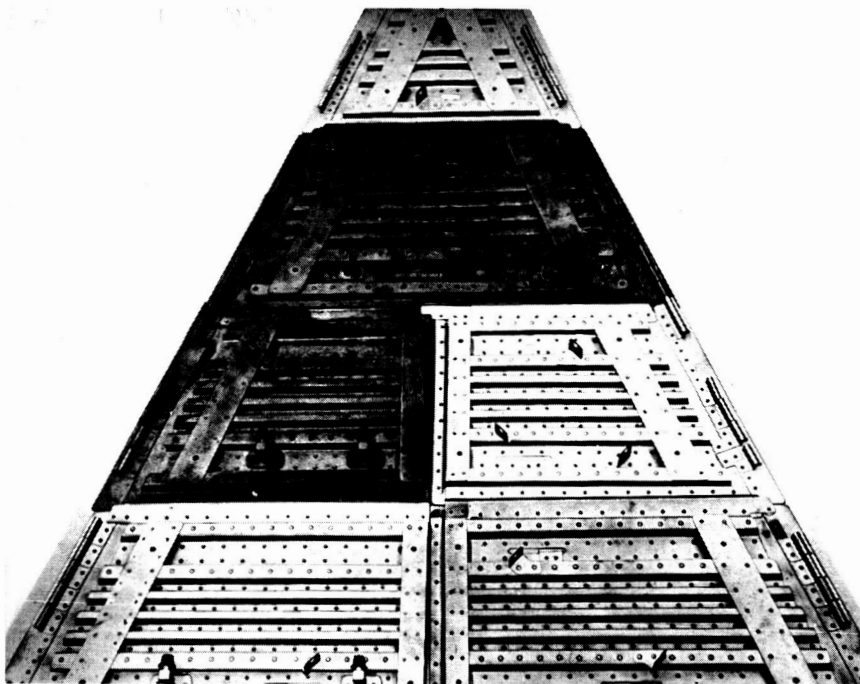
Assembly of fabricated coated refractory metal panels from lower structure of ASSET research reentry vehicle.
